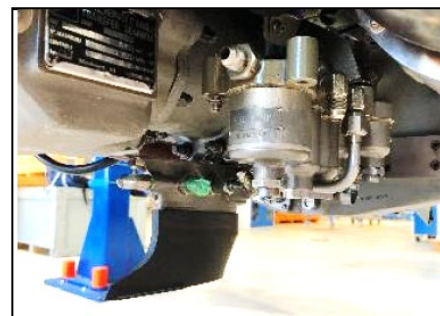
Drain Collector Assembly AFT View (Undamaged)
